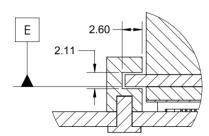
LFF Baseboard Chassis CTF Dimensions (Rail Guide View)
